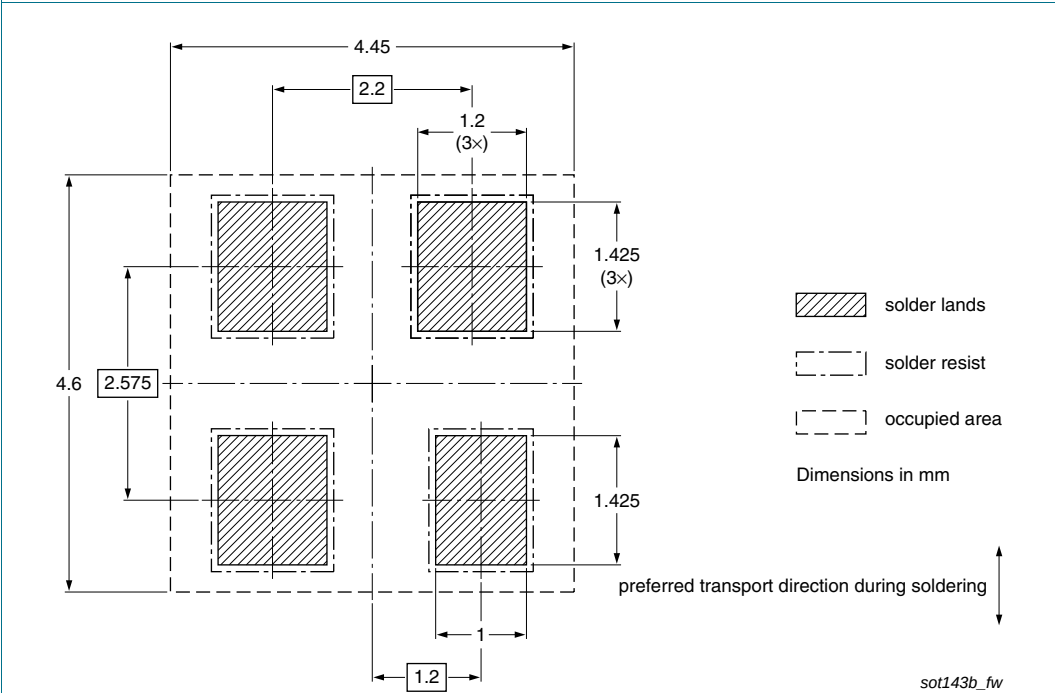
Wave soldering footprint BAS28 (SOT143B)
